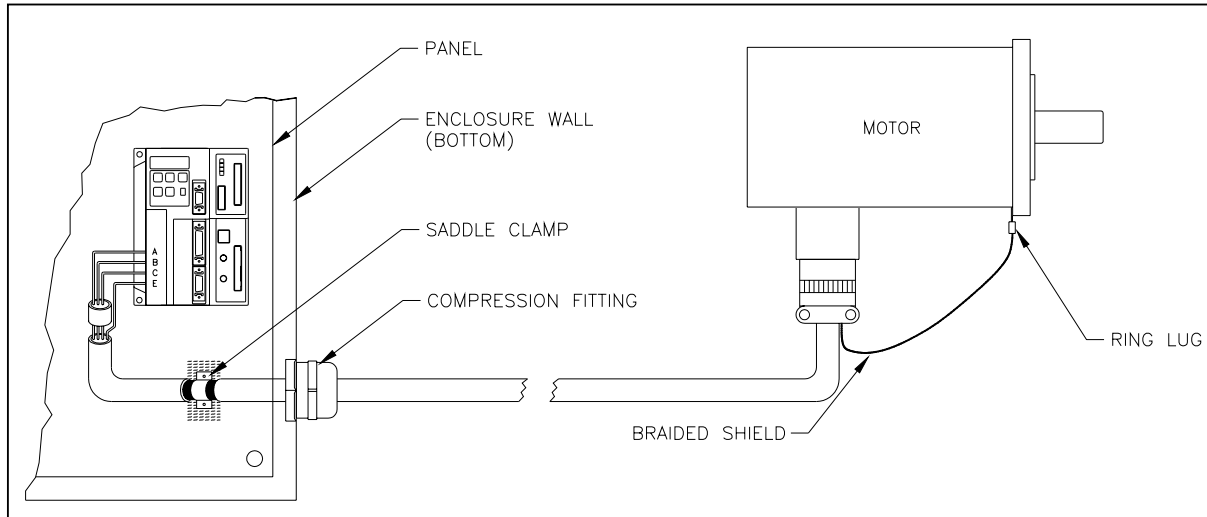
Alternate Method to Ground the Motor Armature Cable
